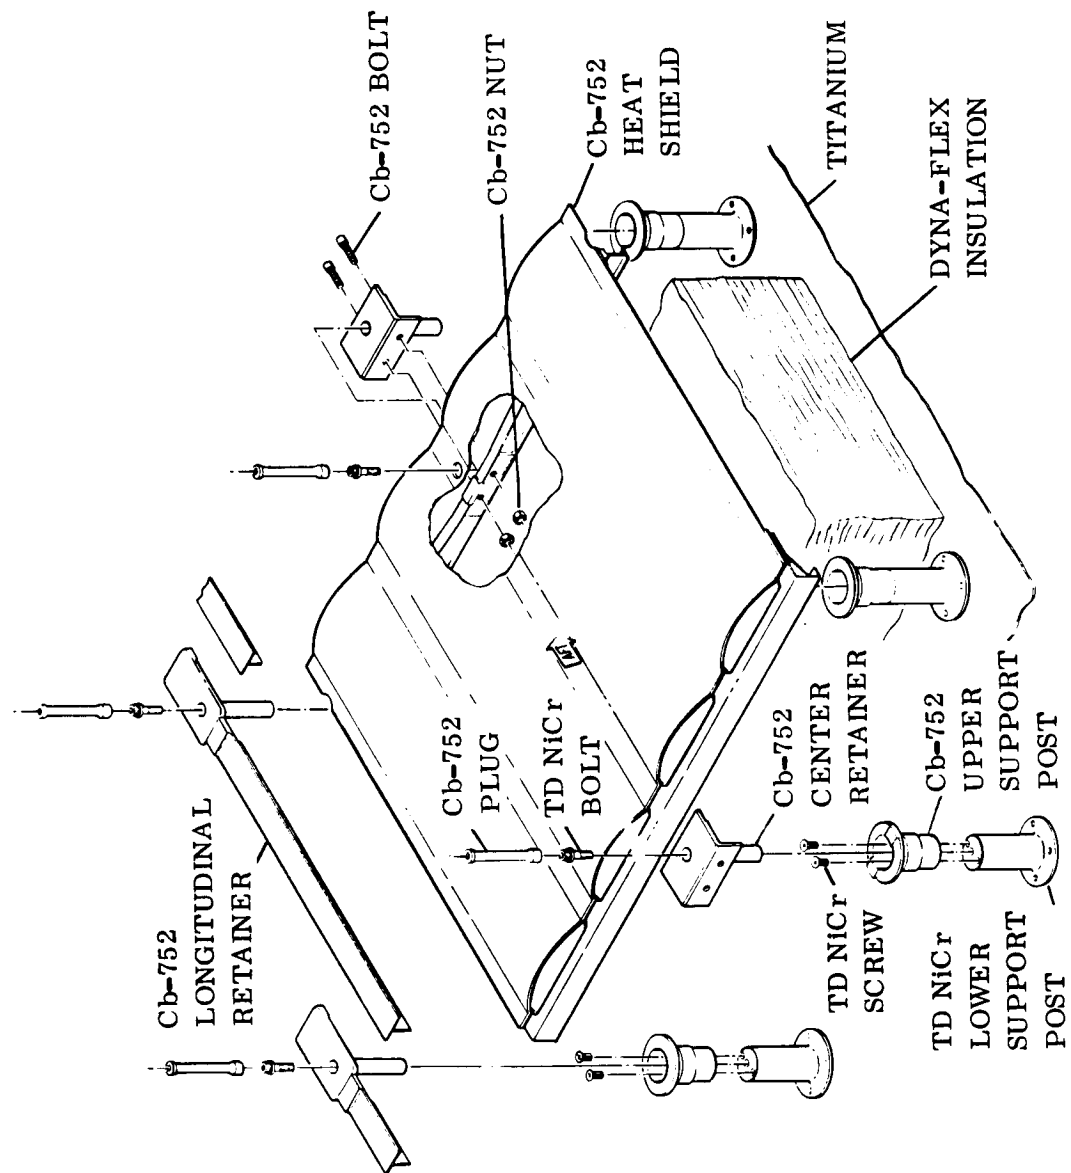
Open-Corrugated TPS Exploded Assembly
